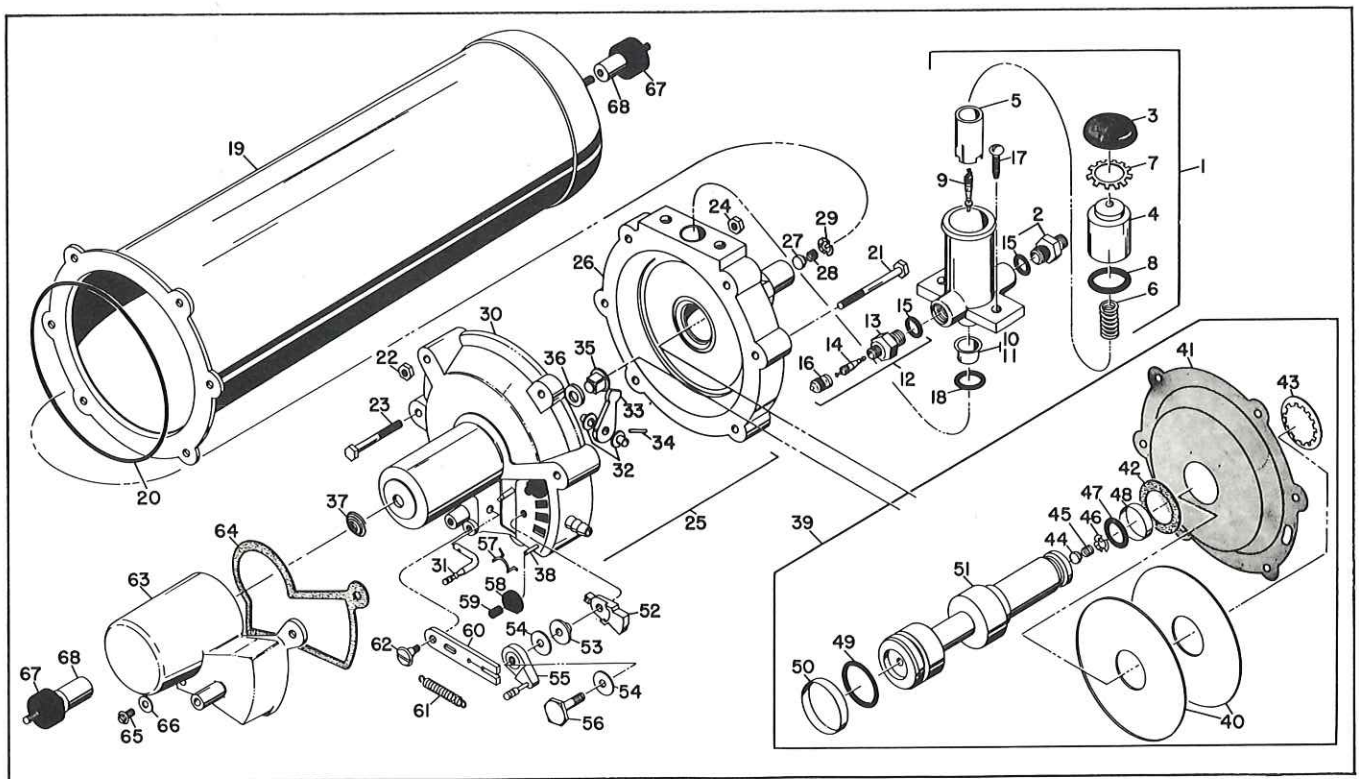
Compressor, Regulator and Reservoir—Exploded view
